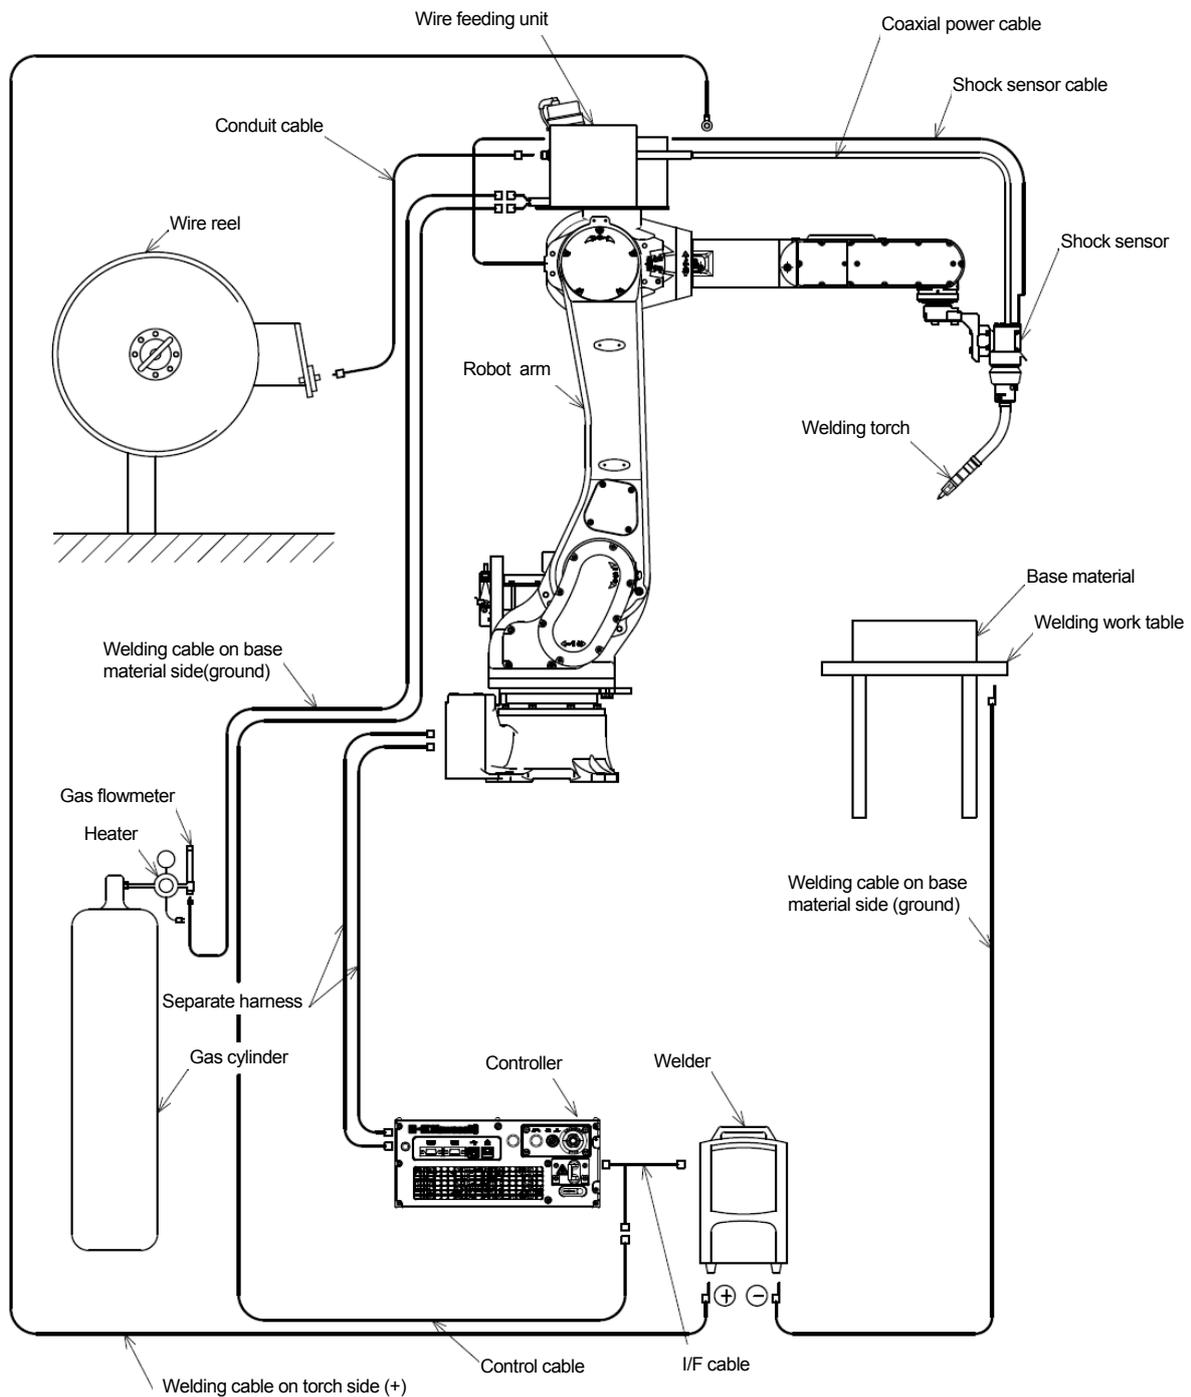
Welding equipment connection example (DAIHEN welder DM-350)
